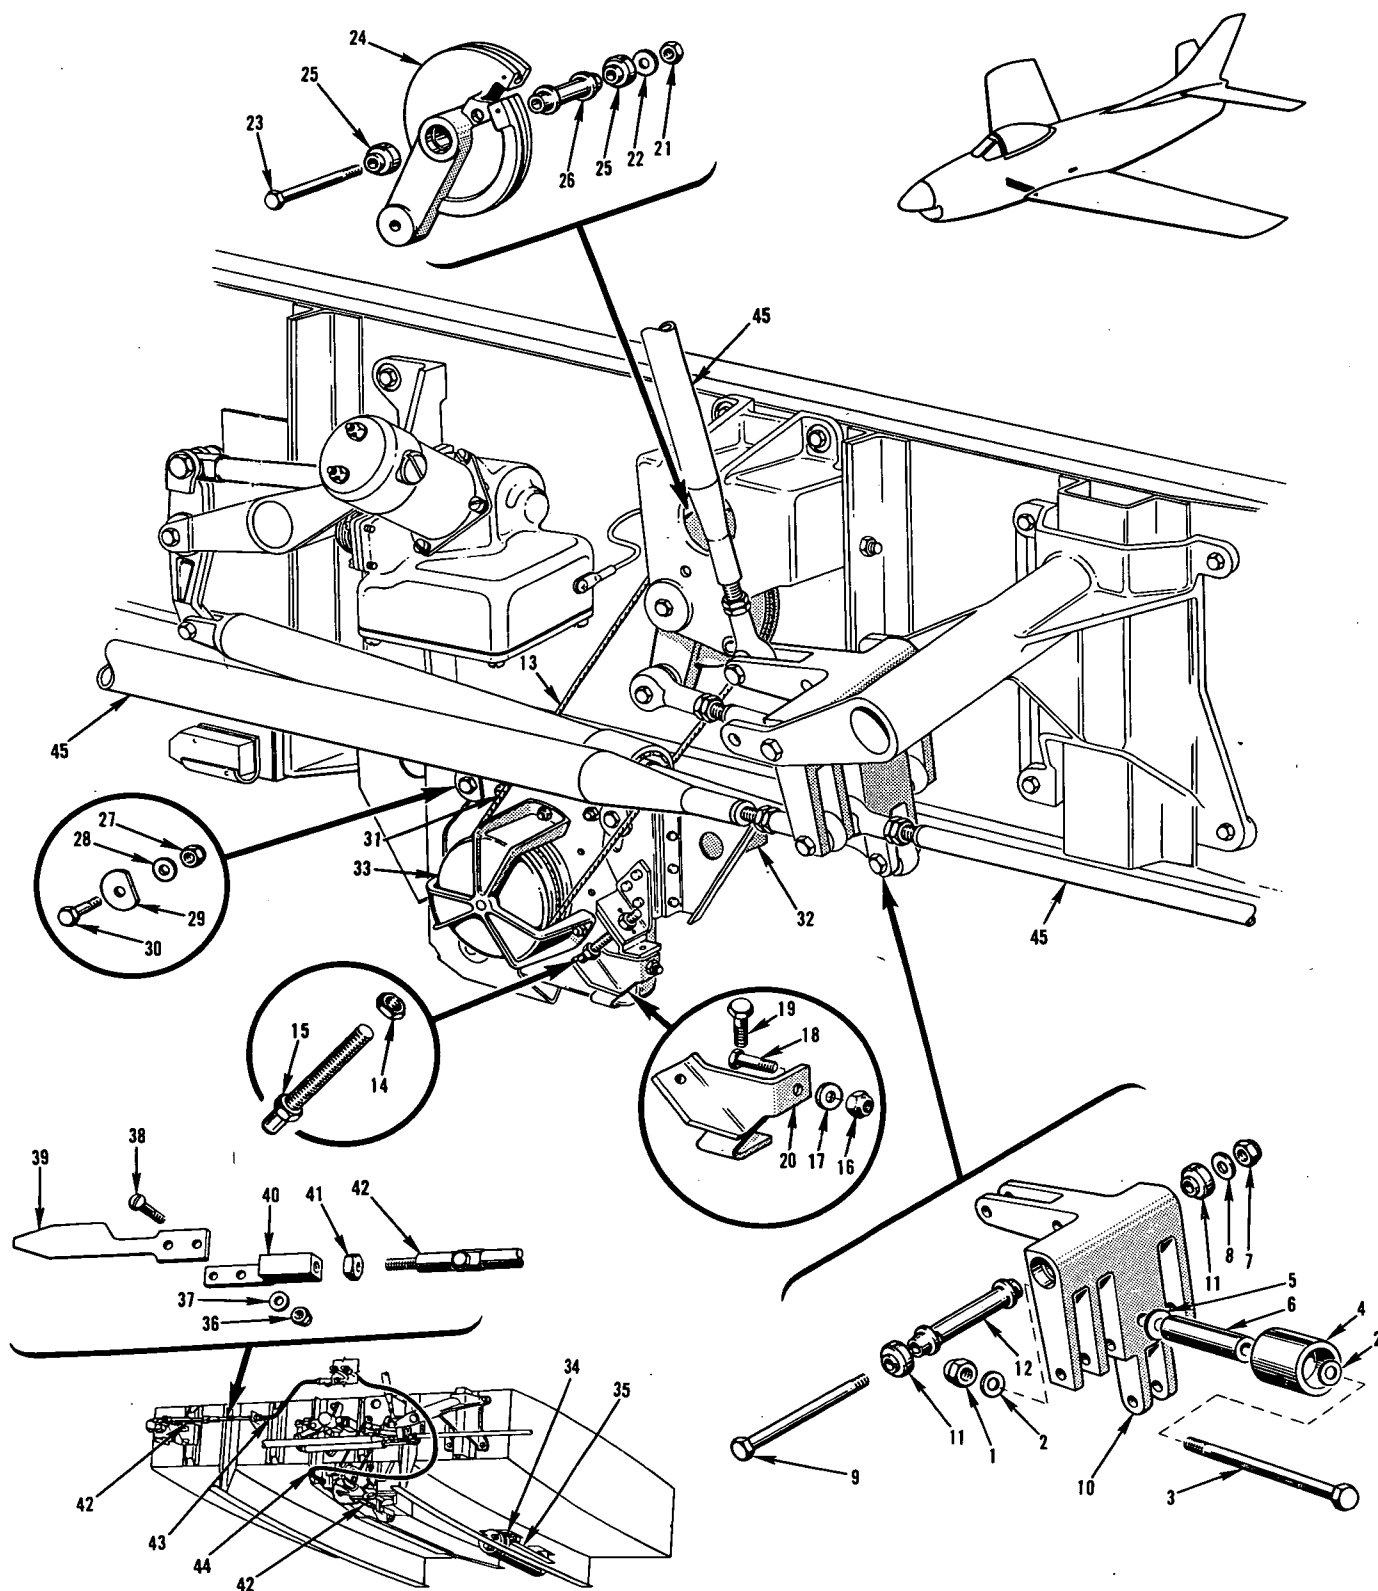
WING CENTER SECTION SURFACE CONTROLS INSTALLATION
